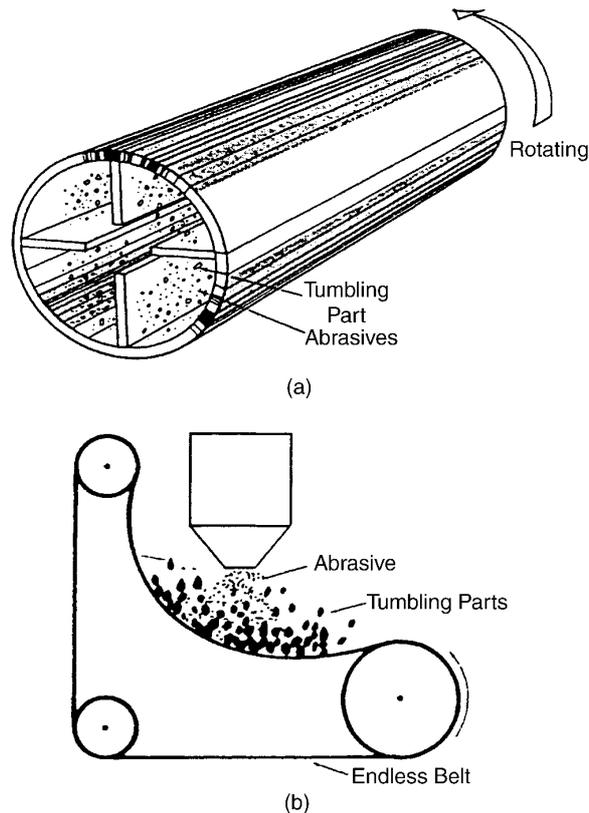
Two tumbling methods: (a) parts being tumbled in a revolving drum and (b) parts being tumbled on an endless revolving belt. (Ref: Richardson, T.A., "Machining and Finishing" *Modern Industrial Plastics*, Howard W. Sams & Co., New York, 1974)
